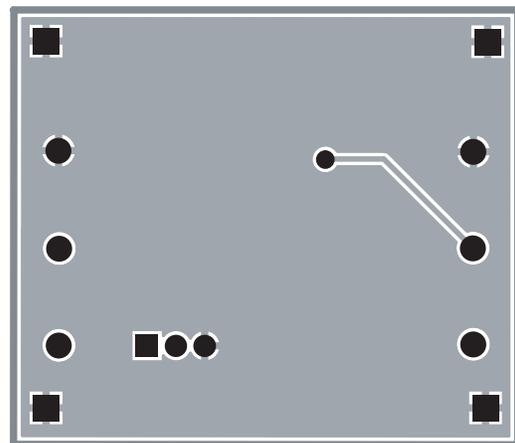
AAT4684 Evaluation Board Solder Side Layout.
